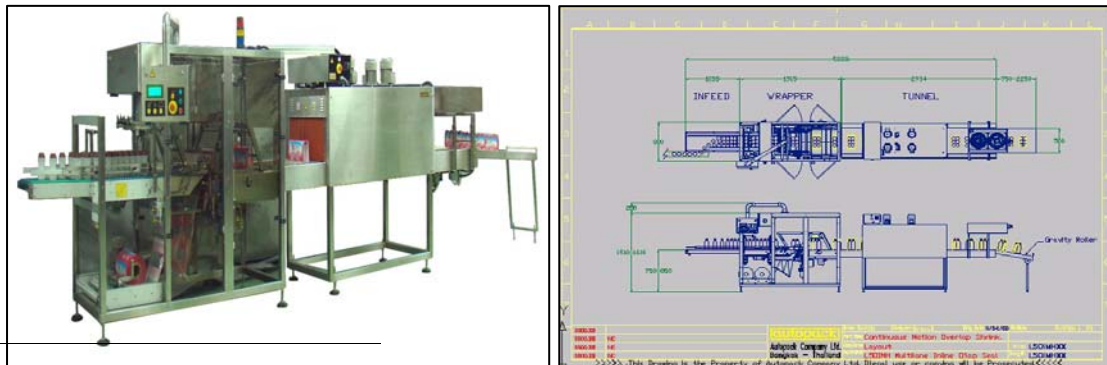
CZH Machine with Zig Zag Infeed for Tray Packing
